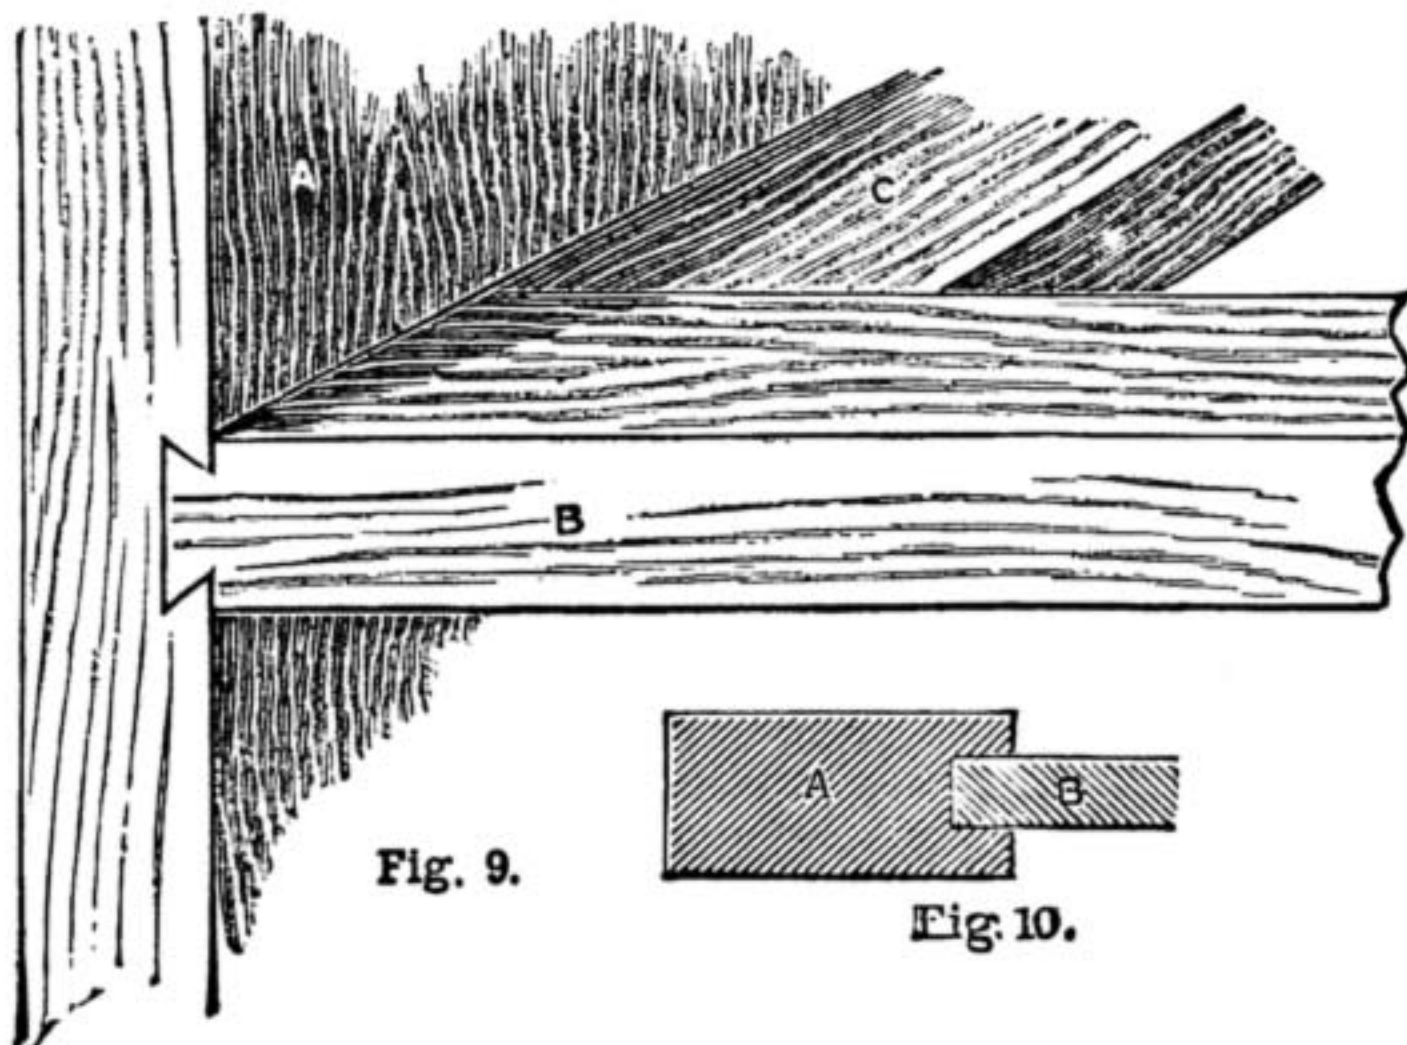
End Bearer and Runner. Figs. 10 and 11.—Fittings of Dust Board.
